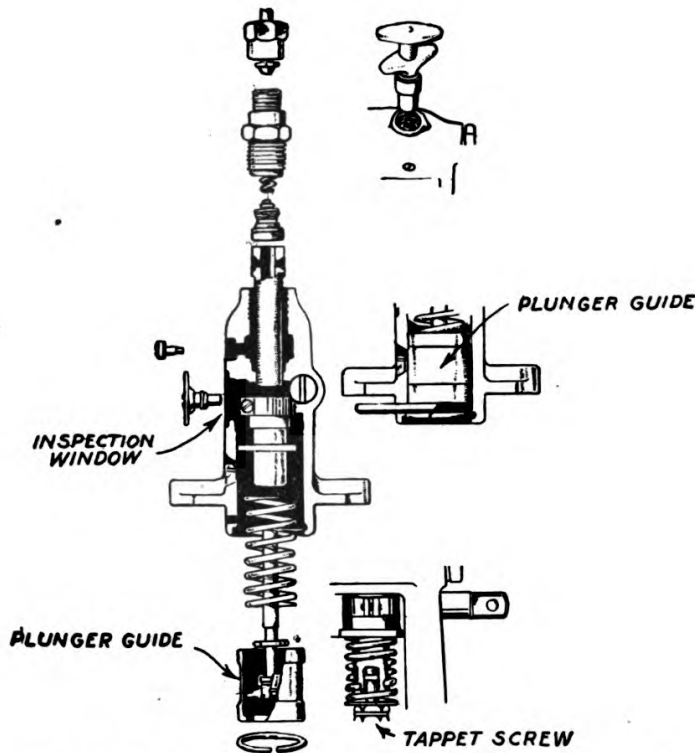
Parts of the Bosch Pump Showing Timing Marks
